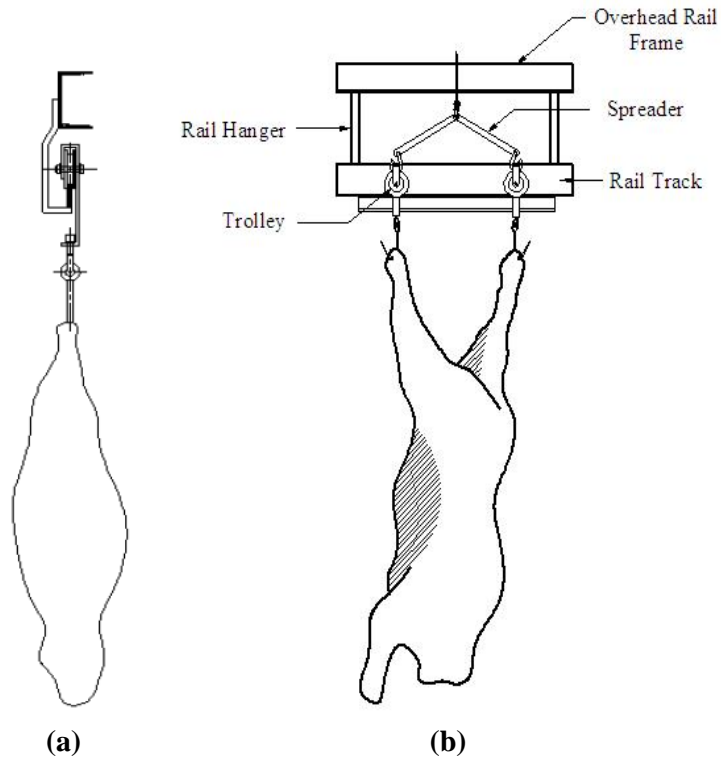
Parts of the overhead rail system. Side view (a) and front view (b)
